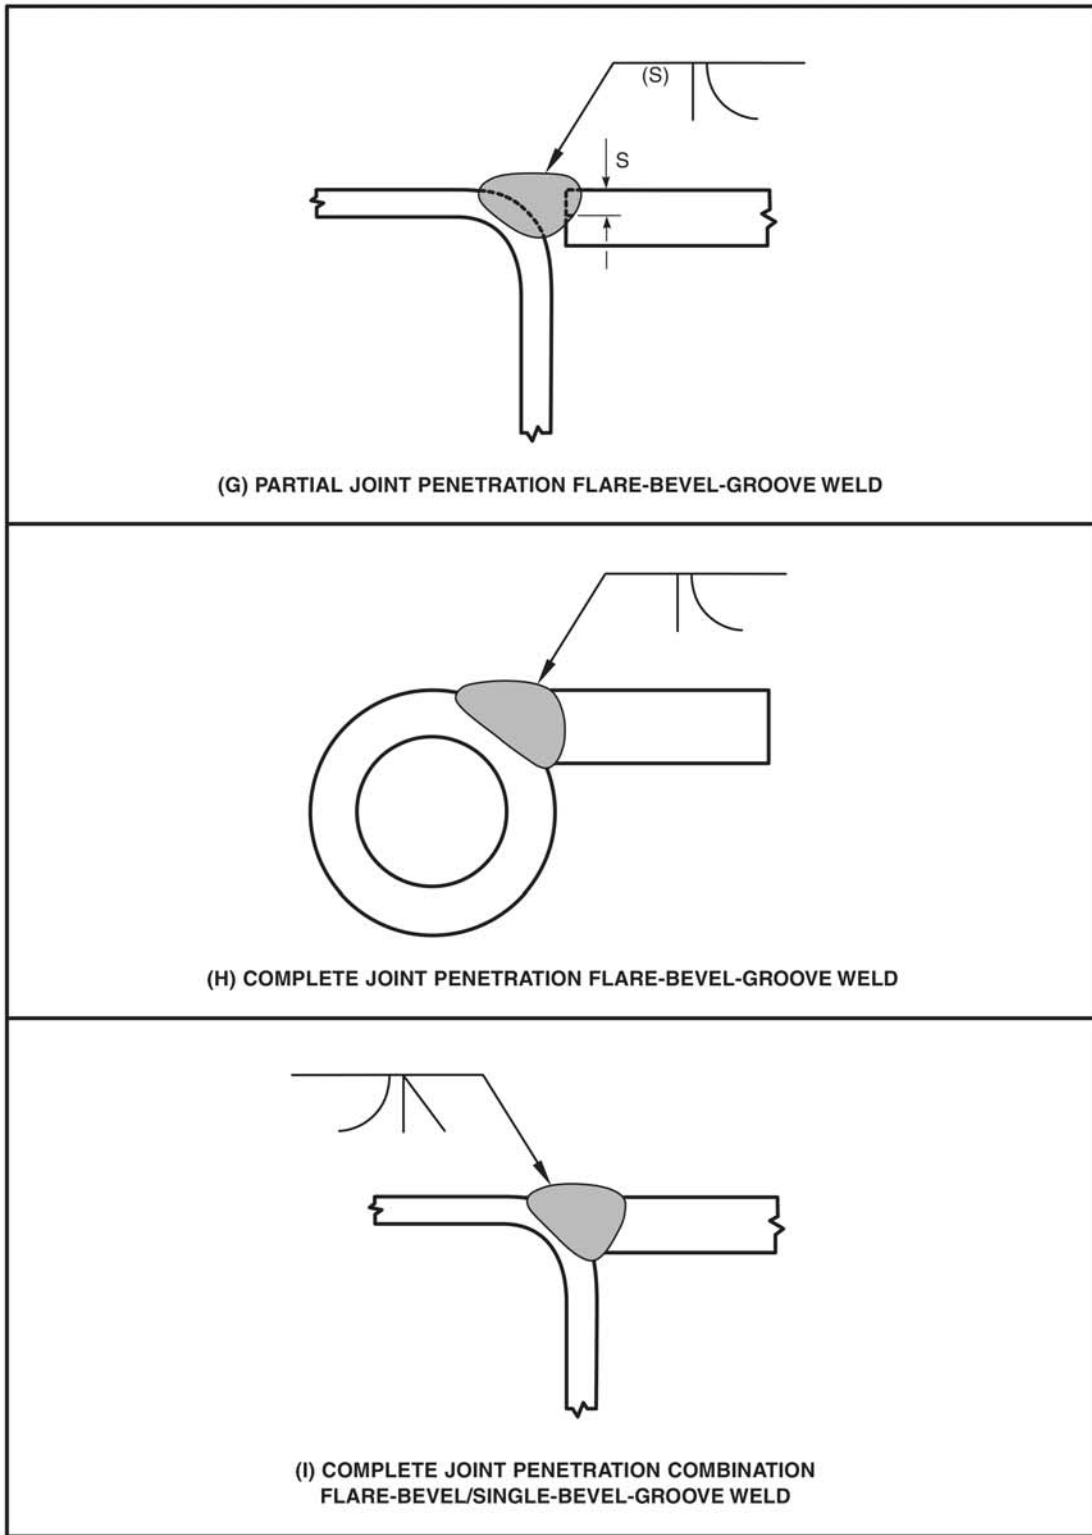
(Continued)—Application of Flare-Bevel and Flare-V-Groove Weld Symbols
